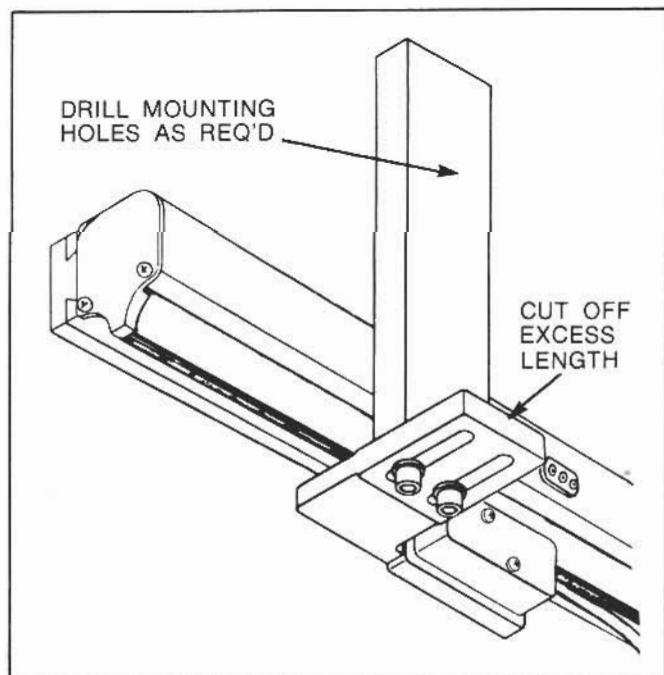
Universal Brackets with Upper Part to the Left of Reading Head.
